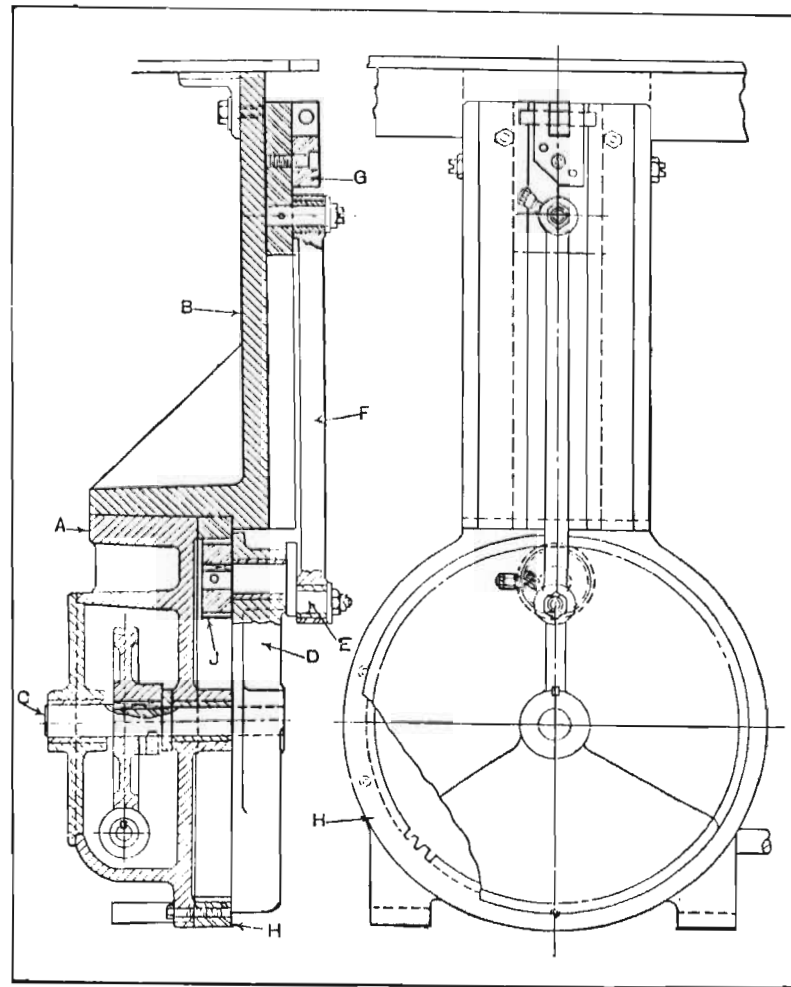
Planetary Type of Crank Motion for Obtaining Dwell of Bending Die
